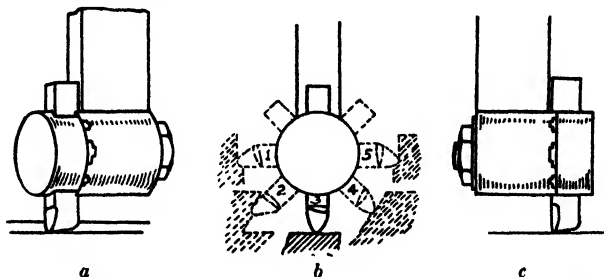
Armstrong plainer and shaper toolholder. (a) Normal position for horizontal cut; (b) tool arranged for (1) vertical cut, (2) angular cut (inside angle), (3) horizontal cut, (4) angular cut, (5) vertical cut; (c) toolholder (and tool bit) reversed, brings cutting edge back of shank of toolholder.
